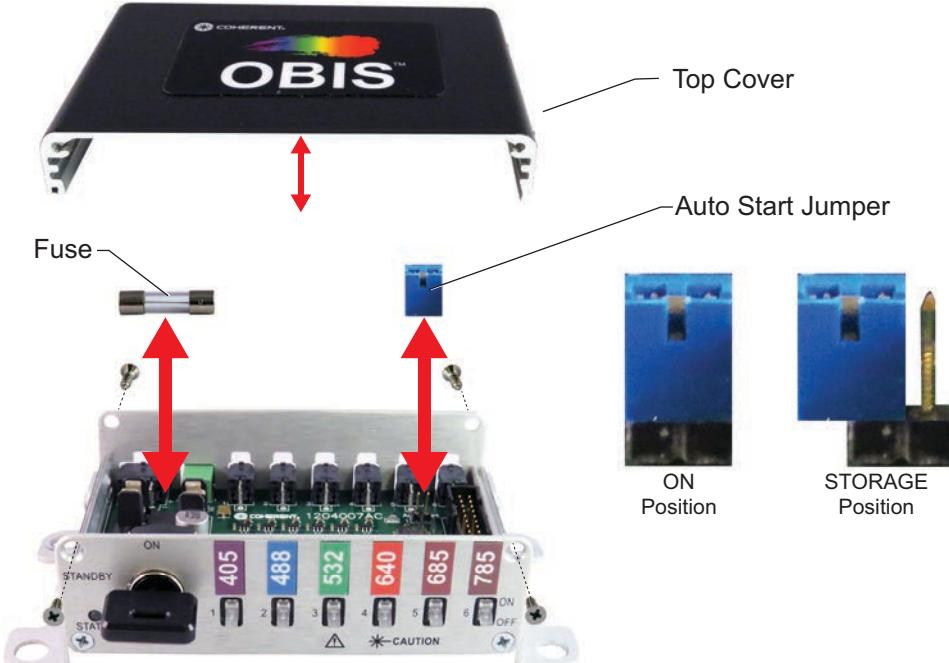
OBIS 6-Laser Remote – Exploded View
